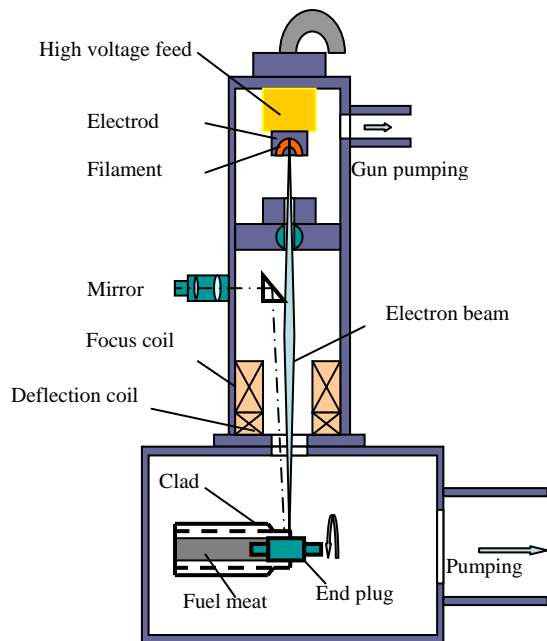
Schematic diagram of the welding machine for joining of the end plug
